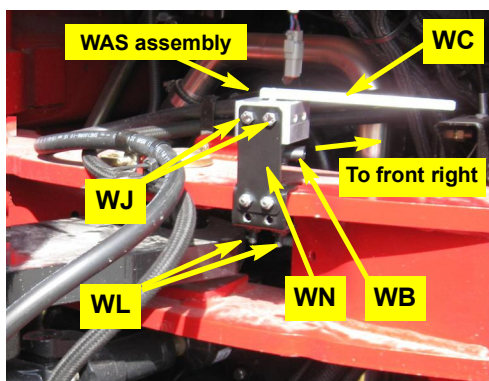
i: Installed WAS bracket assembly and WAS assembly
